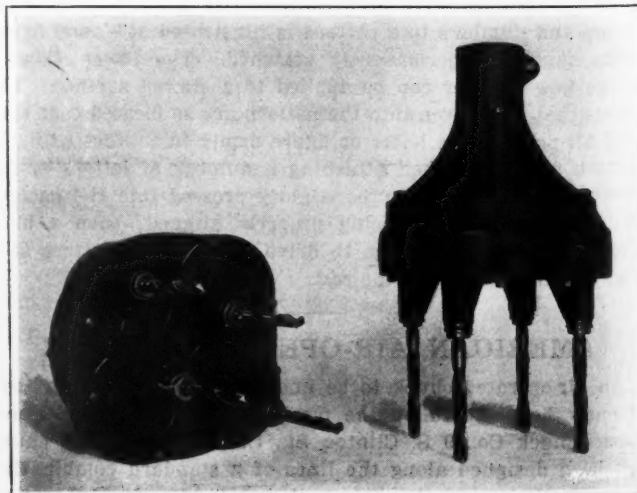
Heinkel Four-spindle Adjustable Drilling Head
